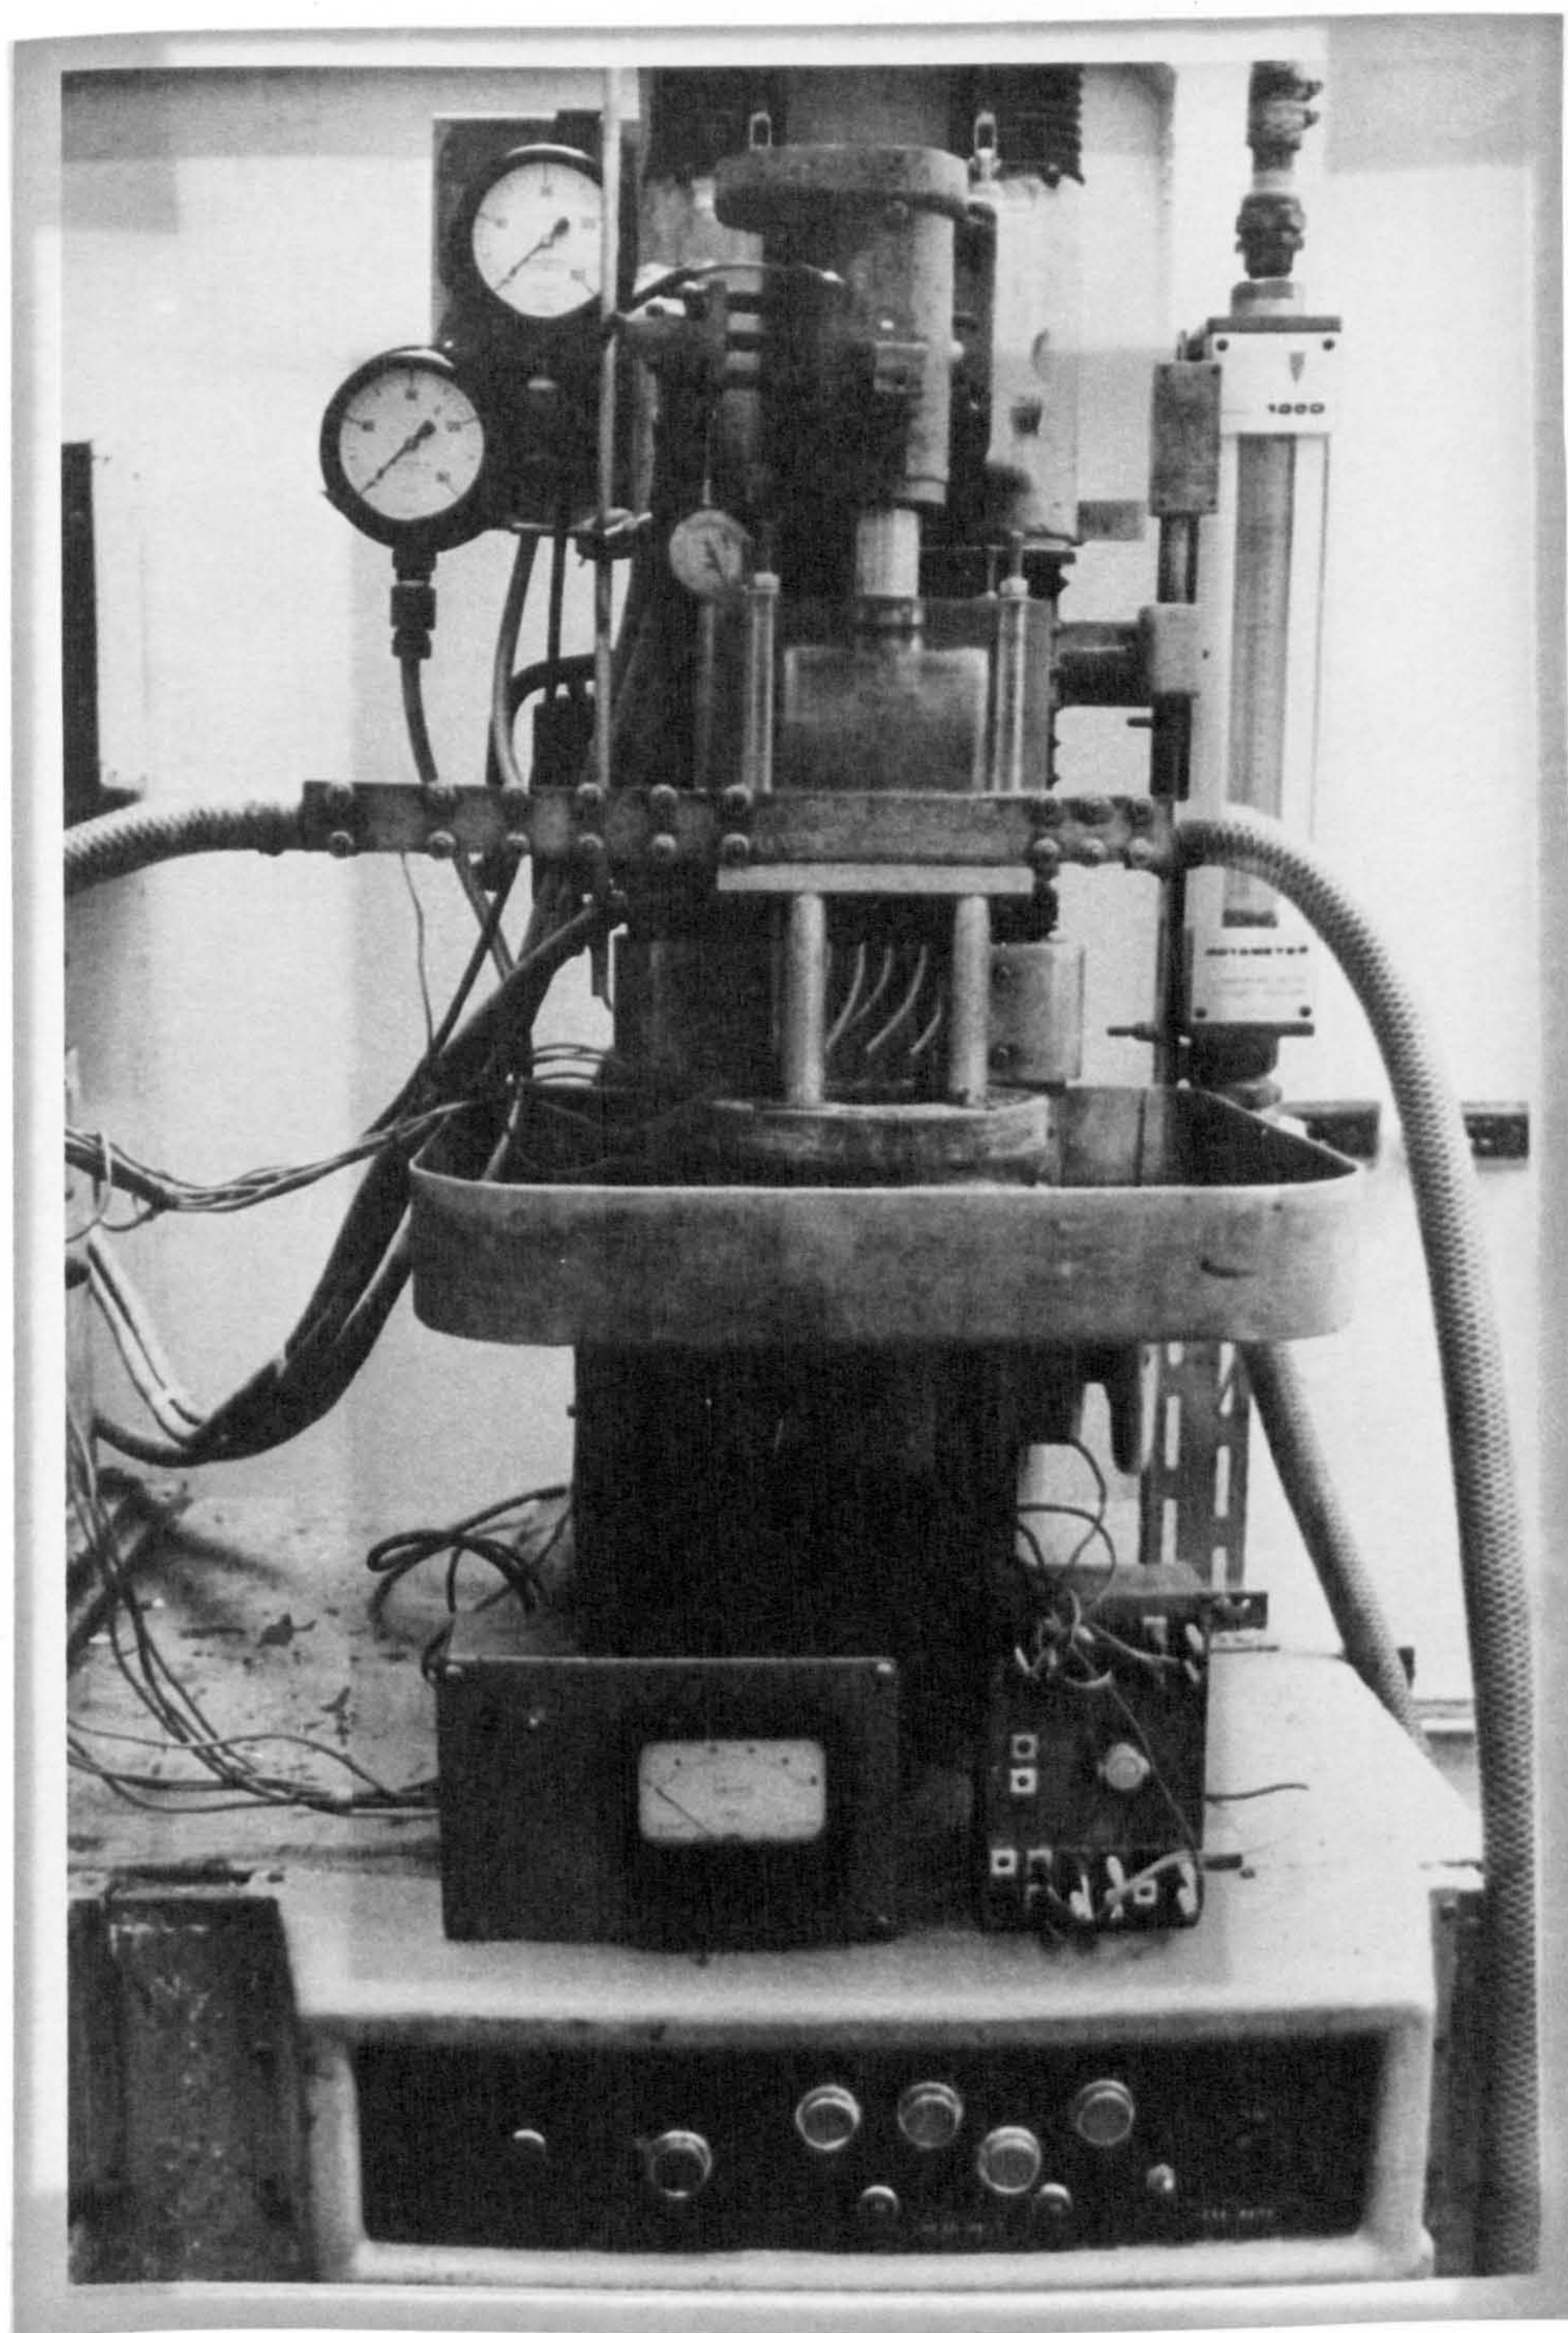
(b) MACHINING CELL ARRANGEMENT
